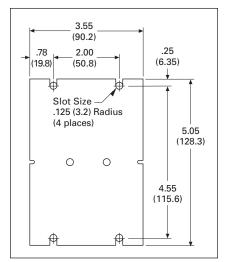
Mounting Hole Pattern for the IQ 200 Base Module — Dimensions in Inches (mm)
